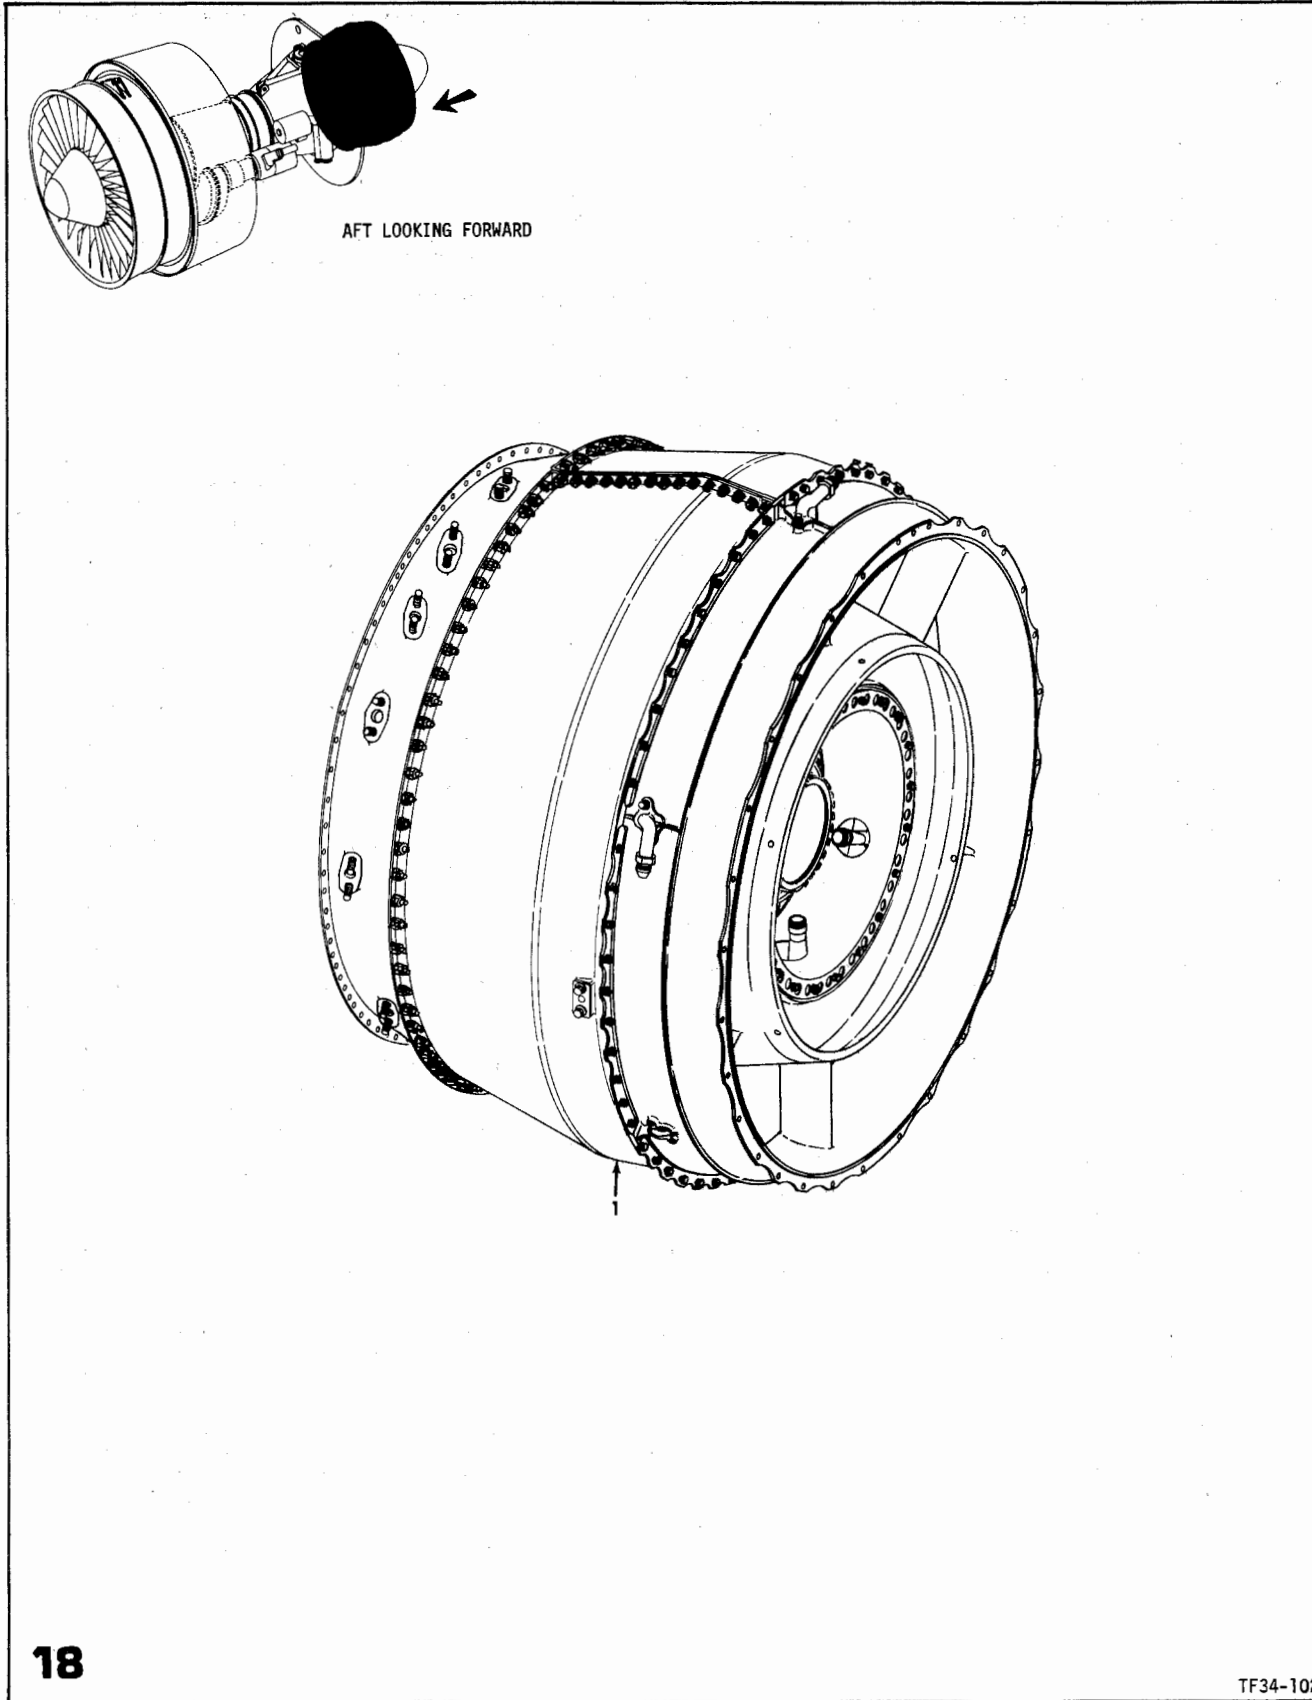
LOW-PRESSURE TURBINE MODULE ASSEMBLY
